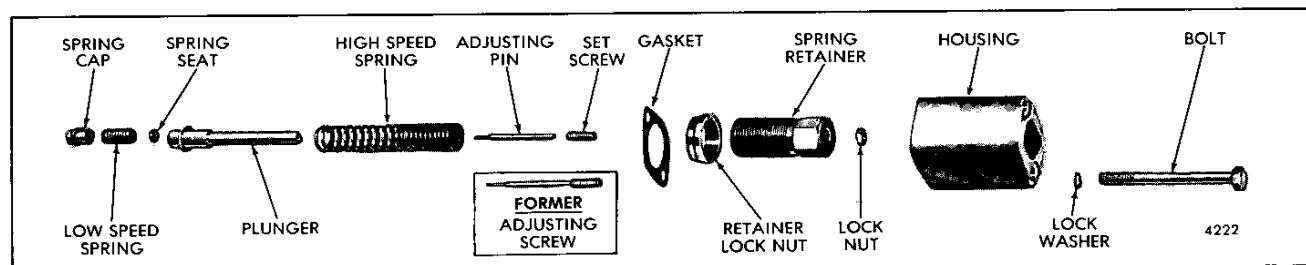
Governor Spring Assembly Details and Relative Location of Parts
